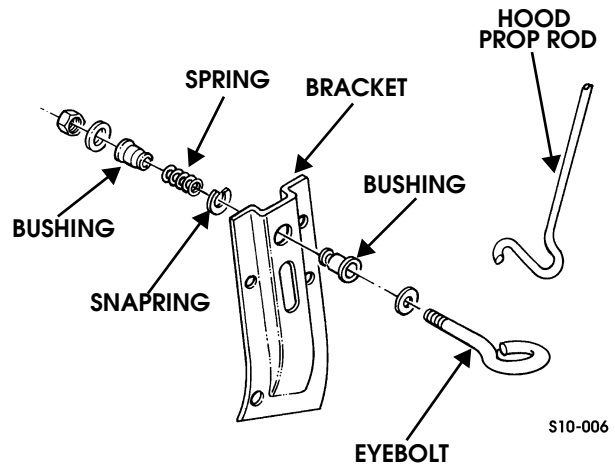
Hood Prop Rod and Bracket Assembly Breakdown
